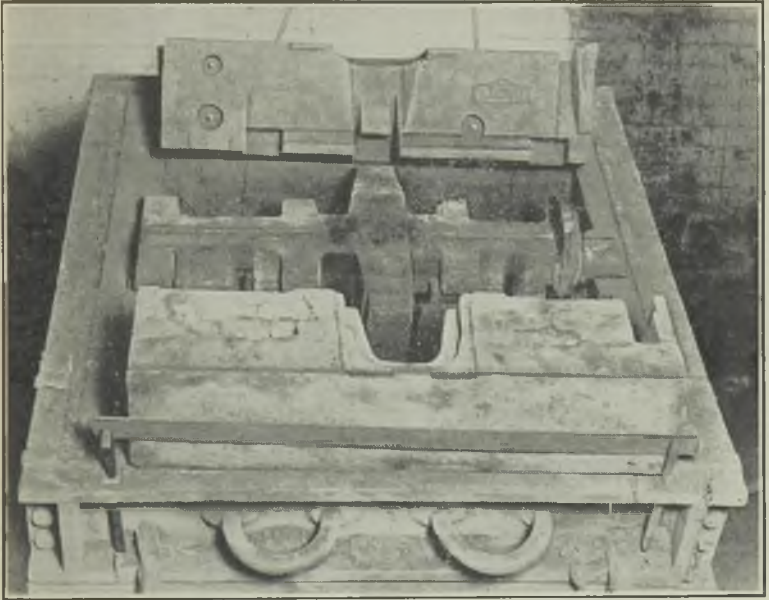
TWO CORES FORMING SIDES OF CASTING ARE SHOWN REMOVED FROM MOULD.
